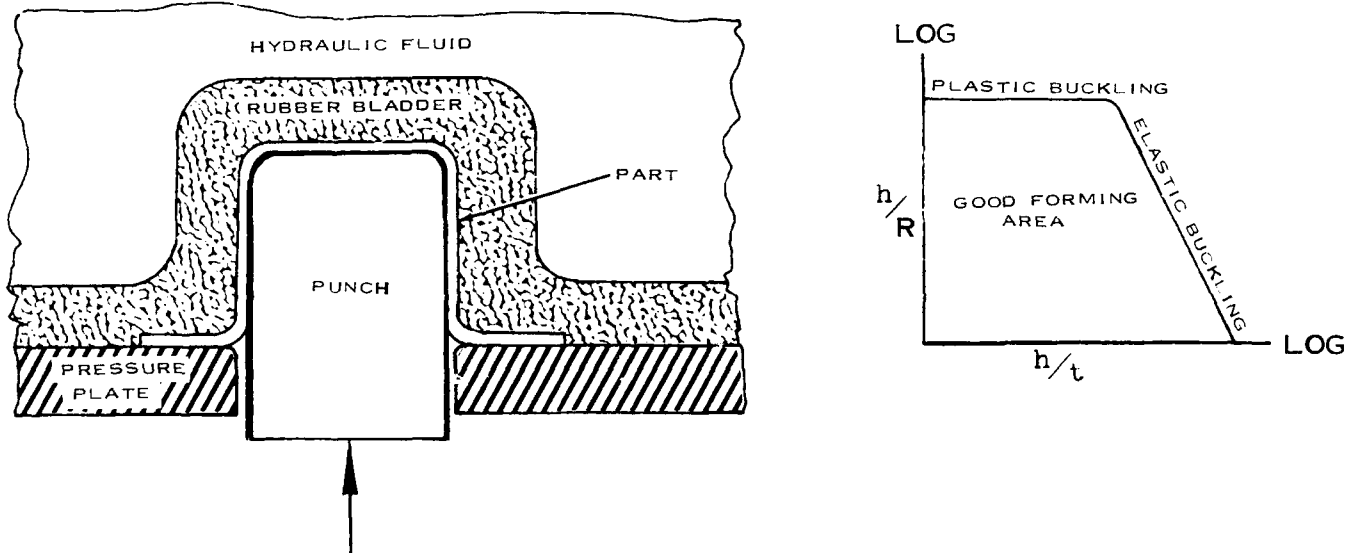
DEEP DRAWING WITH A RUBBER BLADDER PRESS
